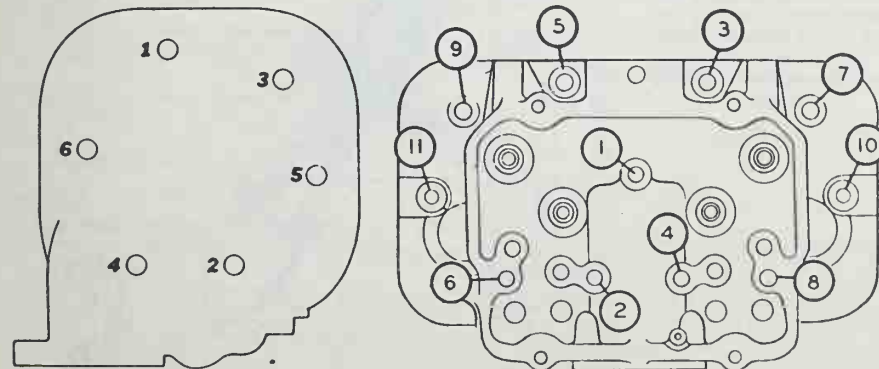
Tightening sequence for cylinder head bolts. Left view: Model DJA. Right view: All other models. Refer to torque value table.
